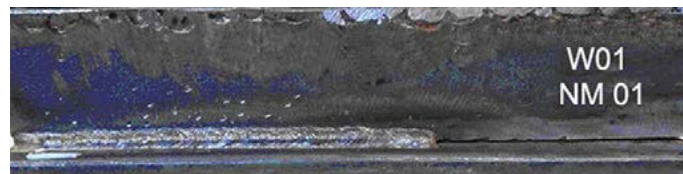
T-joint with the fillet weld (FW) on the side welded using a non-magnetised electrode
